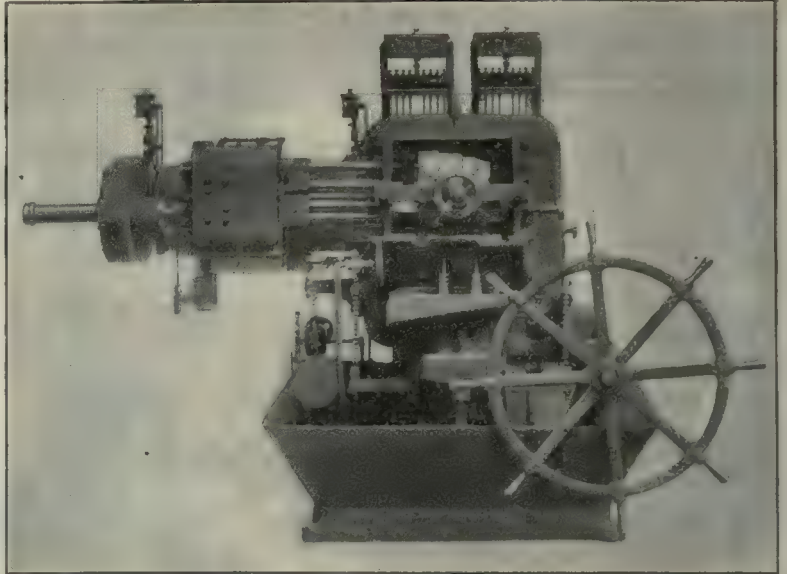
TWO-WAY TAPPING MACHINE WITH INVERTED HEAD
